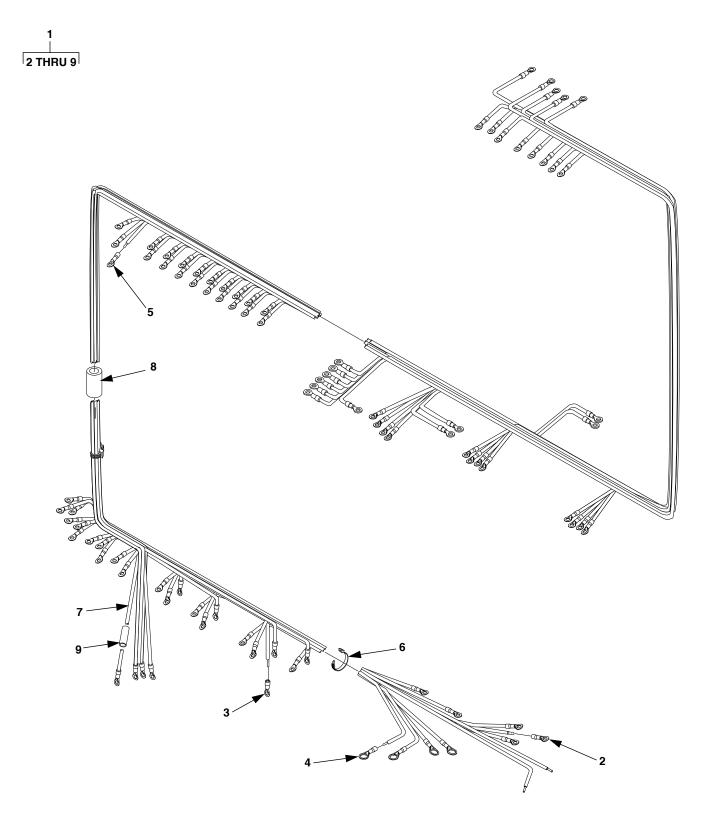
Switch Box Harness Assembly (Sheet 1 of 2).
